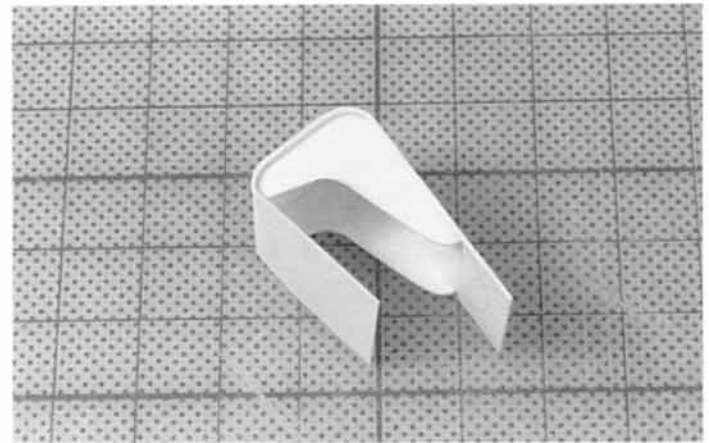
Rough-cut the seat and then roll the plastic sheeting around the seat base, gluing it as you roll. This is why the seat backing needs to be made of thin sheet stock.
